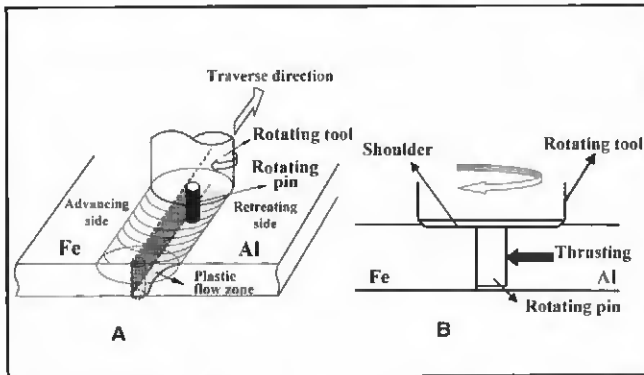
Schematic of the rotating pin position in this study: A — Bird's-eye view of the method; B — view of the cross section perpendicular to the weld interface.
